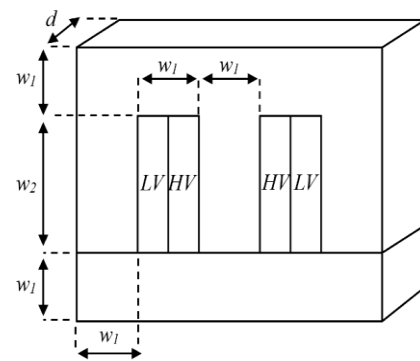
Basic geometrical dimensions of an EI-core single-phase transformer
